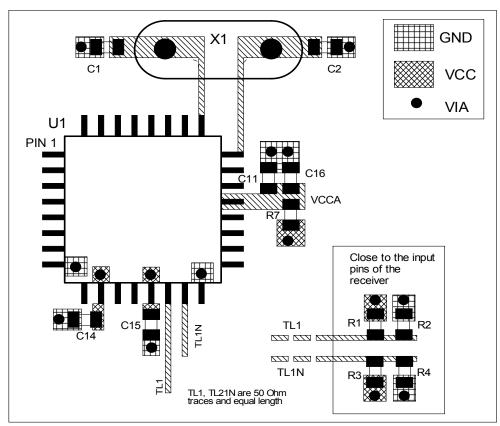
B. PCB BOARD LAYOUT FOR ICS843020-01
